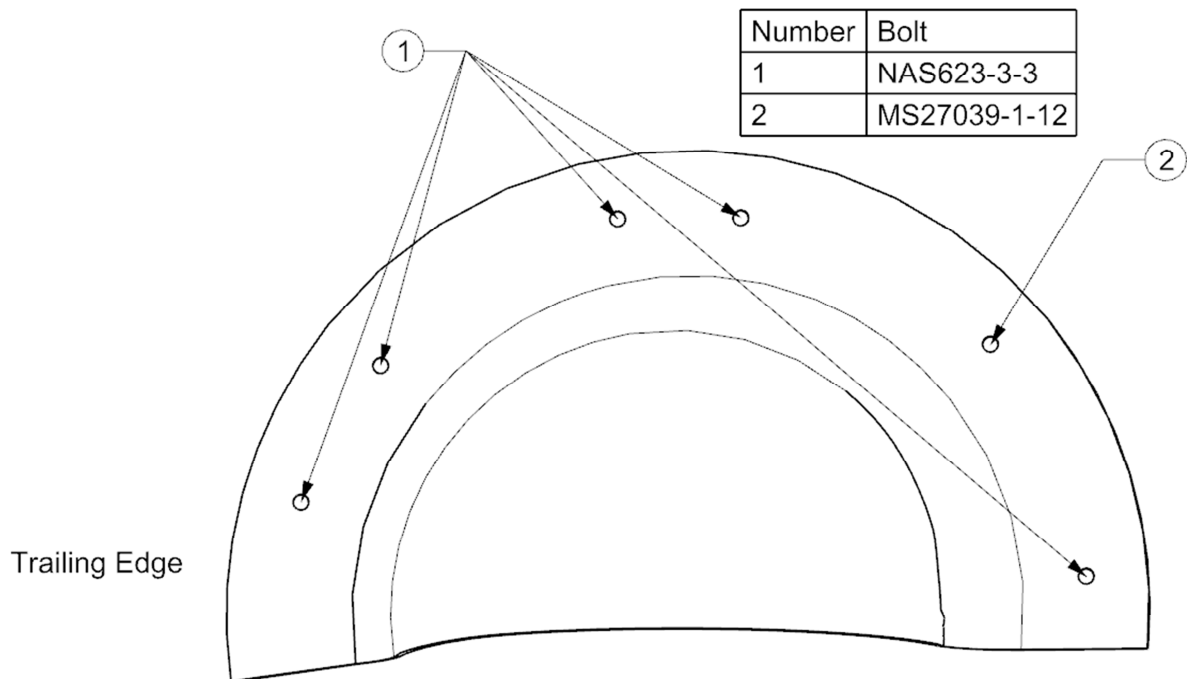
Outboard Wing Pylon Aft Lug Cover Fastener Placement
